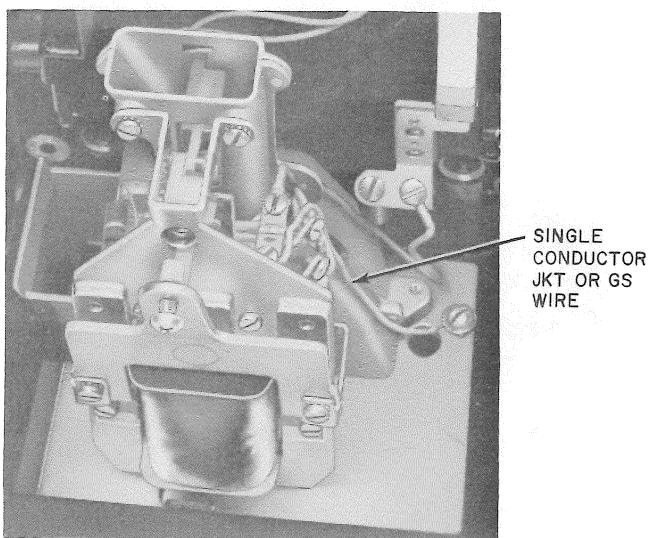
Method of Grounding Coin Collector Housing Assembly, Open Type Installation
